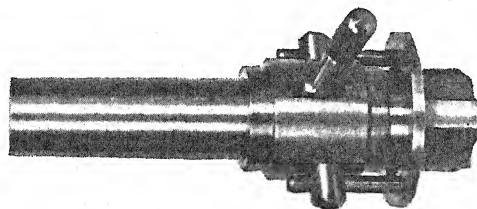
The Murchey Machine and Tool Co. Lever Handle-Type Nonrotating Collapsible Machine Tap.
